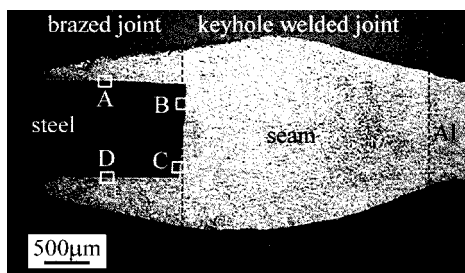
Cross-section of laser deep penetration welding-brazing Al/steel joint
